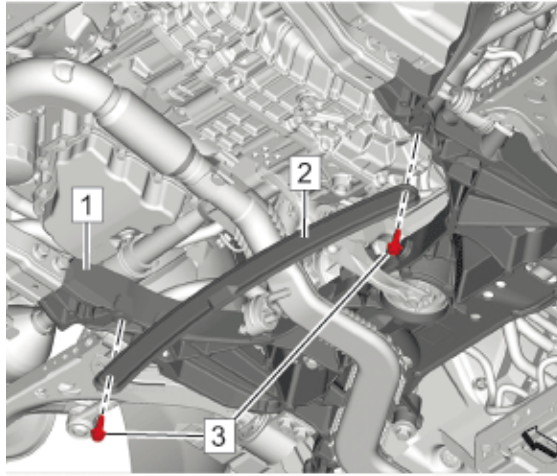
Drivetrain And Front Suspension Cradle, Brace And Bolts
